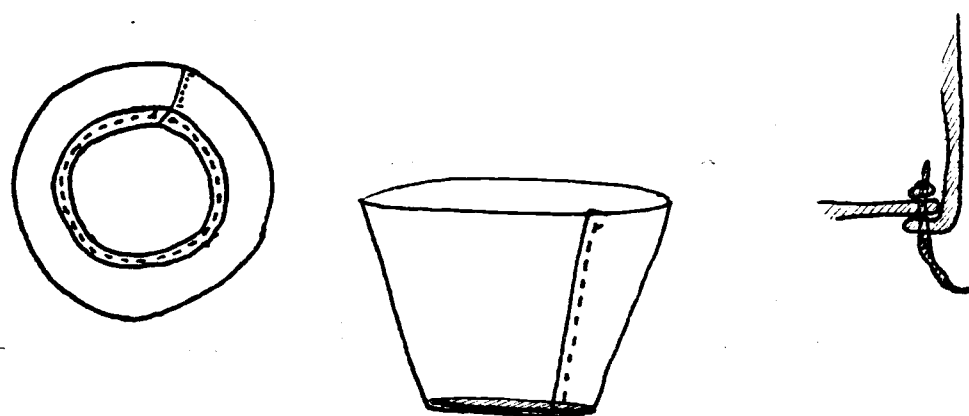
Construction of Rawhide Mould, Continued. Left, Exterior Bottom of Mould with Base in Place. Center, Completed Rawhide Mould with Base Laced Into Place. Right, Detail Cross-Section of Lacing on Base of Mould. Base Piece is Horizontal, Wall of Cylinder Vertical. It is Necessary to Soak the Lower One Half to One Inch of the Cylinder Wall in Water to Make it Pliable. Then This can be Bent to Form the Overlap at the Seam Line.
